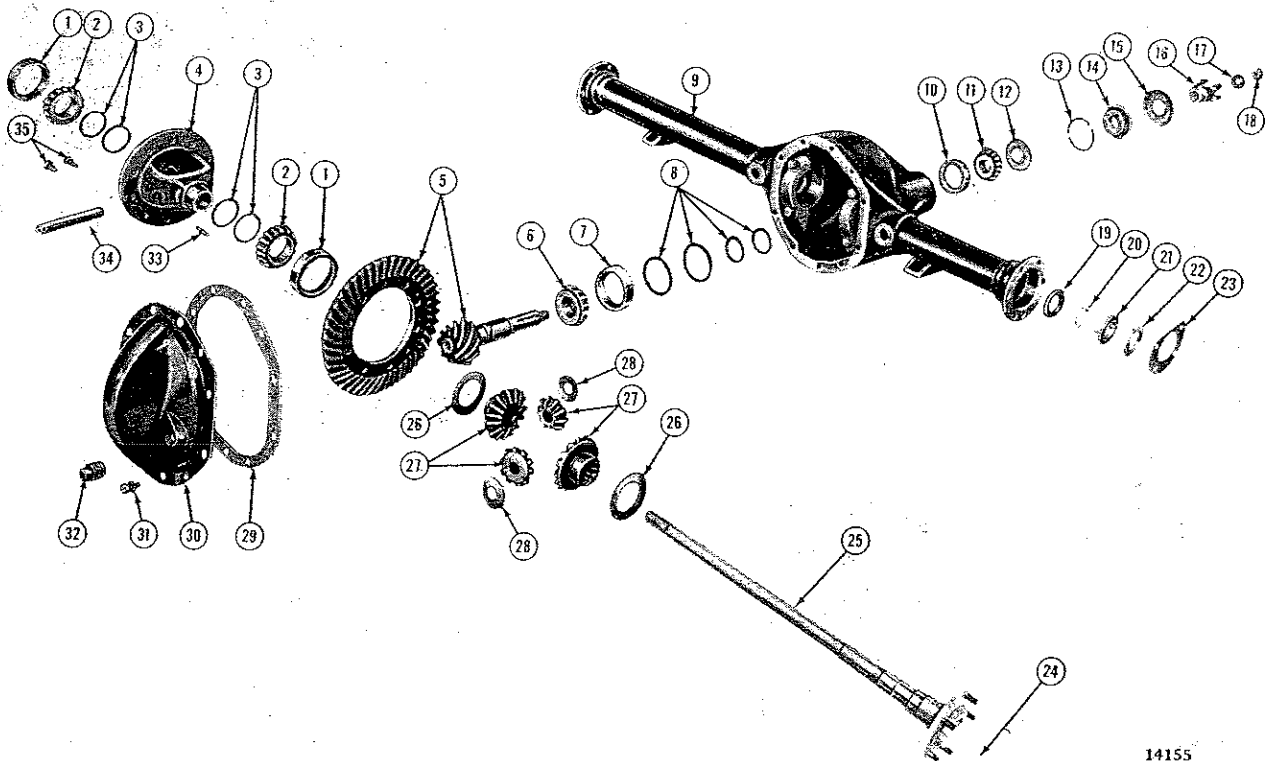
SEMI-FLOAT REAR AXLE ASSEMBLY—FLANGED SHAFT
